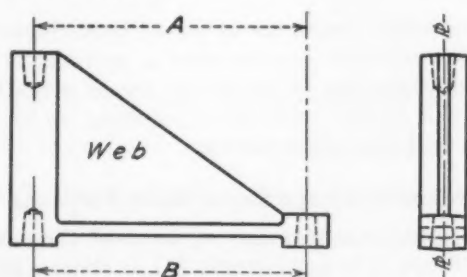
When dimensioning holes or bosses at different levels, a web should be used for strengthening part. Wider tolerances are needed for dimension A than B to avoid warpage after ejection.
